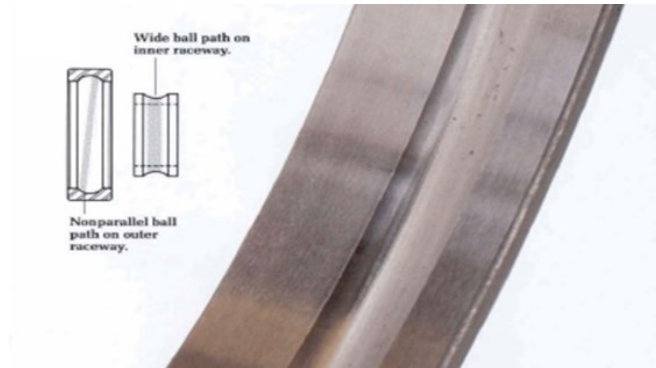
Misaligned wear path and its location of ball bearing [10].
